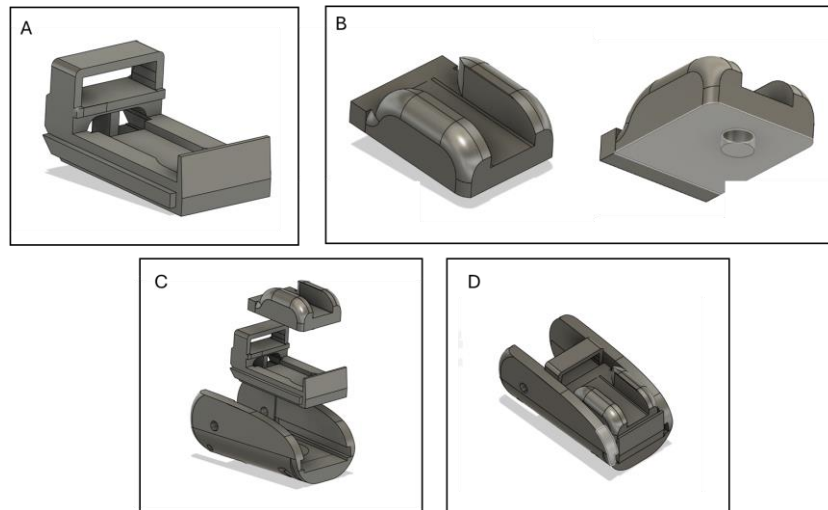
Fingertips (A) base component (B) cover component (C) all components (D) assembly.
